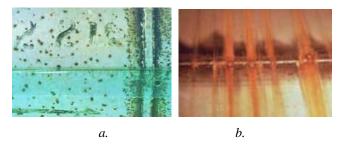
a. Embedded iron on the surface of stainless steel; b. corrosion of stainless steel weld (brushing with carbon steel brush).
